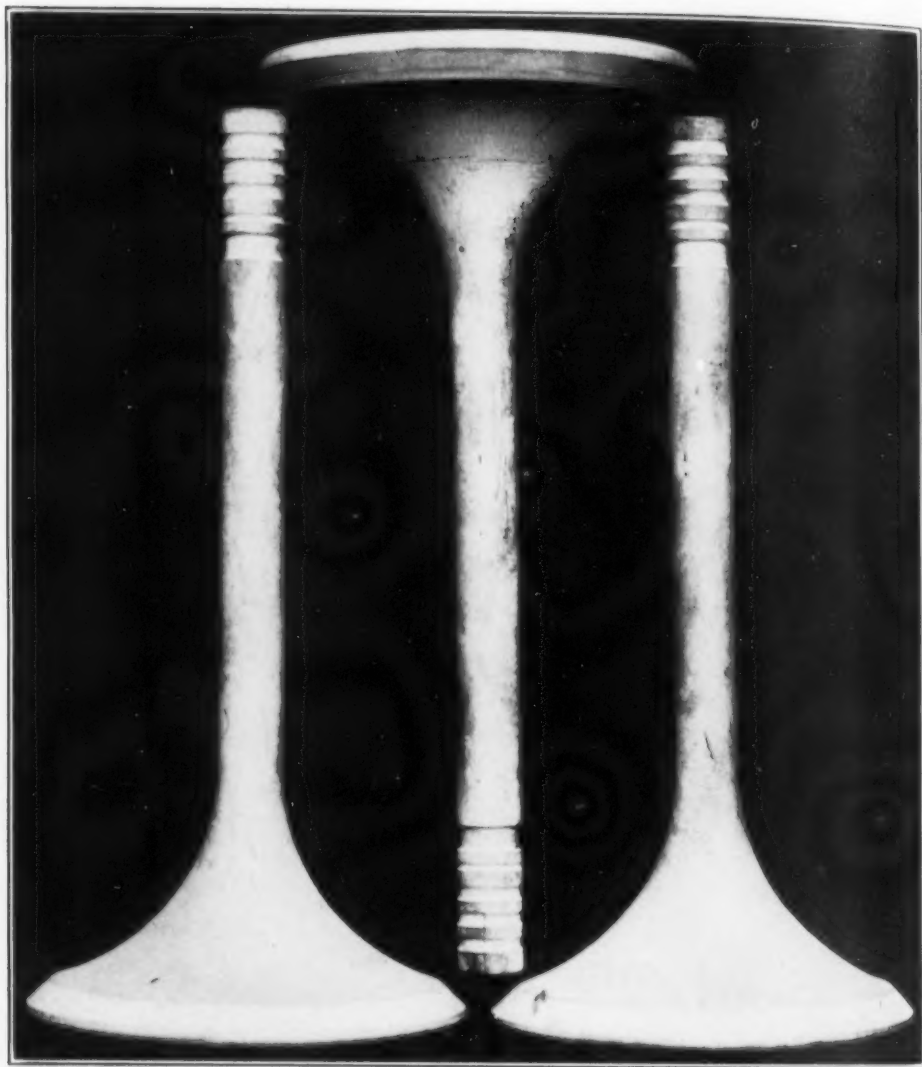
Photograph of Valves, Coarse Etched and Zinc Plated, Showing Surface Cracks, Slightly Reduced.
